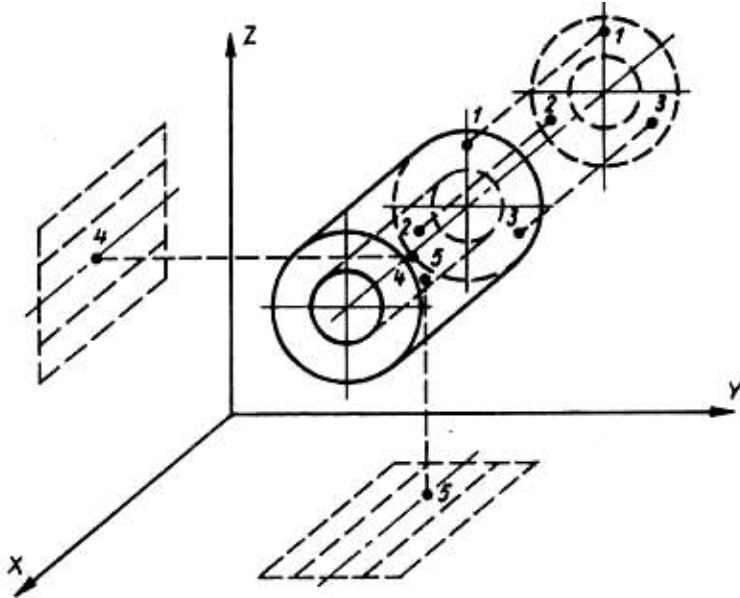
Diagram for locating of workpiece on cylindrical hole
